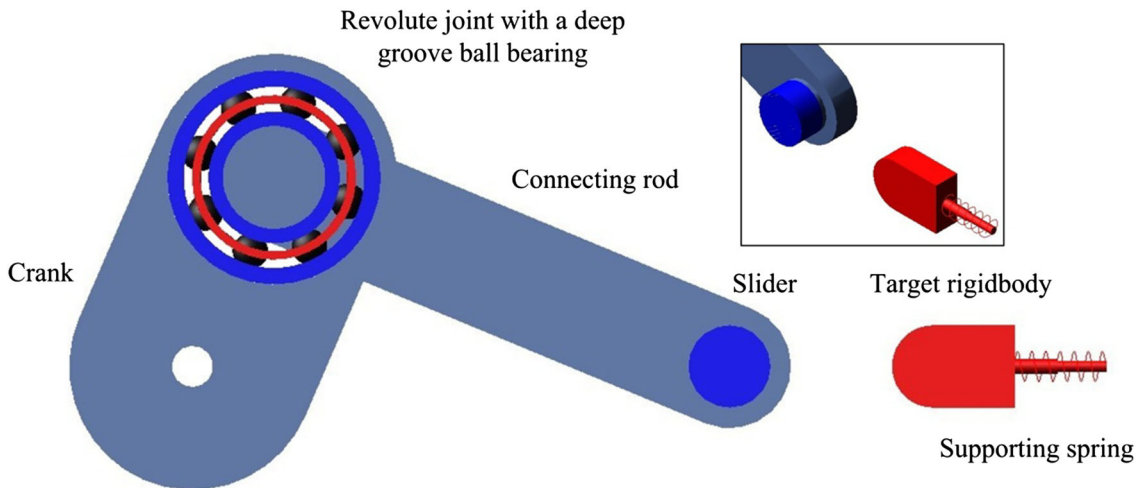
An ADAMS model of the impact slider–crank mechanism with a rolling ball bearing joint
